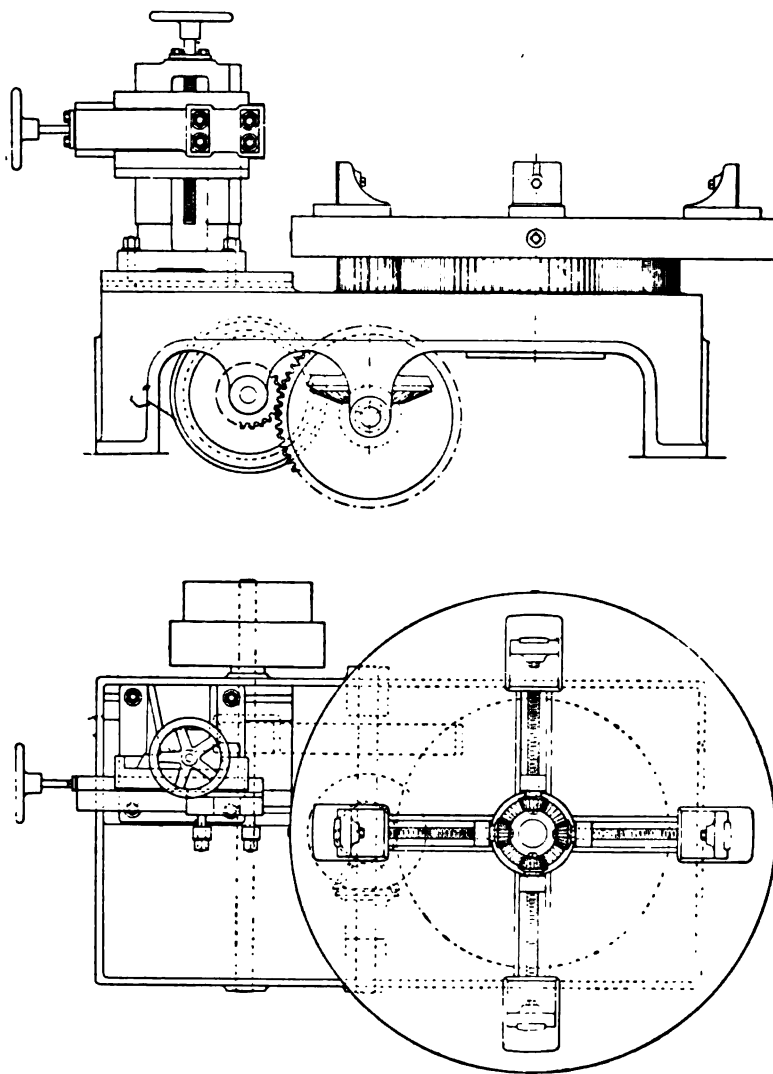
Boiler Flue Flange Turning Machine. (Rushworth & Co.)
